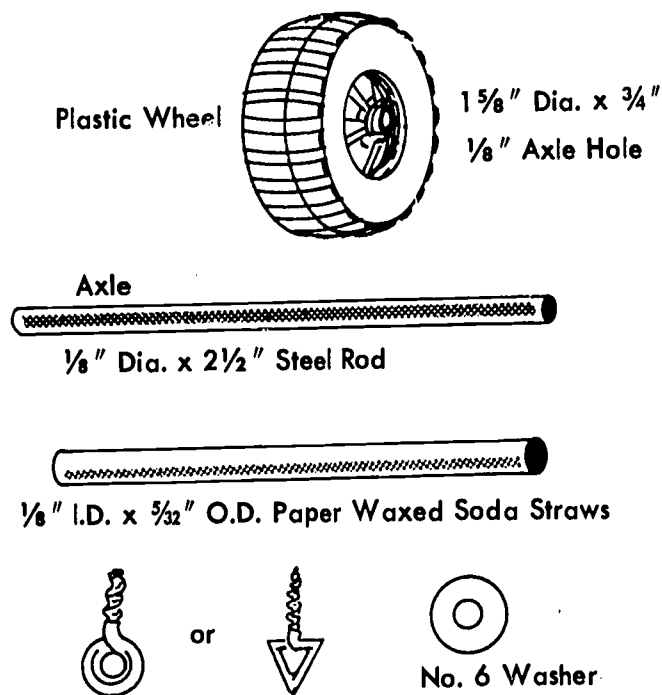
B-2. Wheel, Axle, and Bearing for LSRAV
